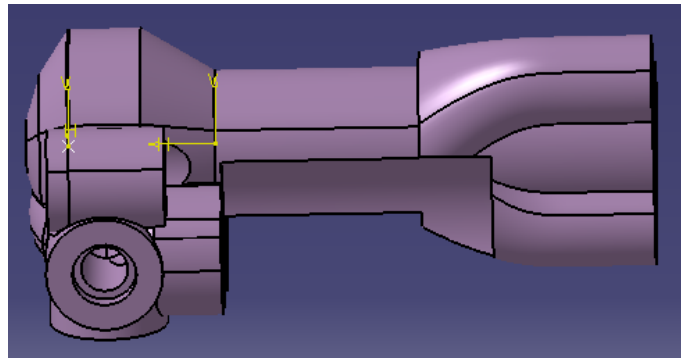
, CAD drawing of air drill side view (Grindley, 2014)
